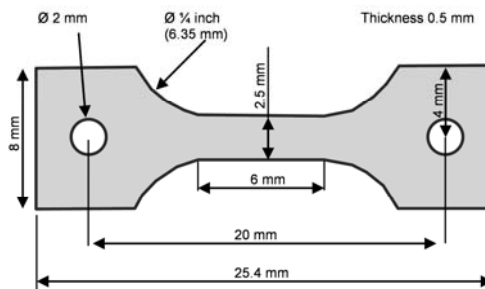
Dimensions of the bone coupon. The two holes are used only for references for machining and testing, and do not carry any load.
